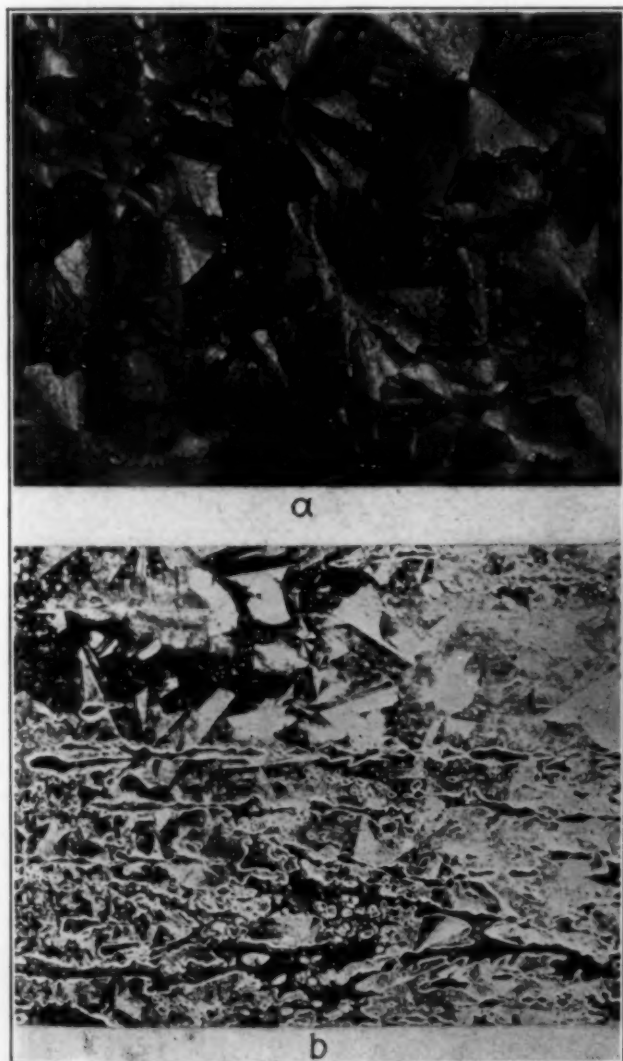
SURFACE APPEARANCE OF HOT-DIPPED SHEETS
